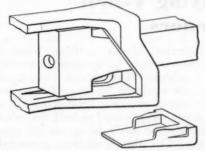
Miner coupler lock yoke before assembly with the coupler
